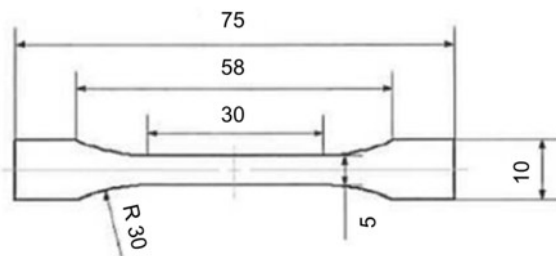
Dimensions of the dumbbell-shaped specimen used for tensile testing
